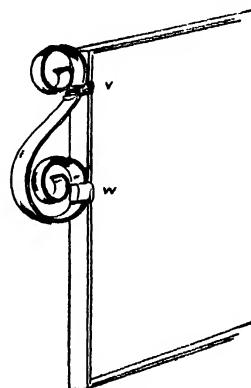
SIDE VIEW OF THE CARD-HOLDER (Design 230).
